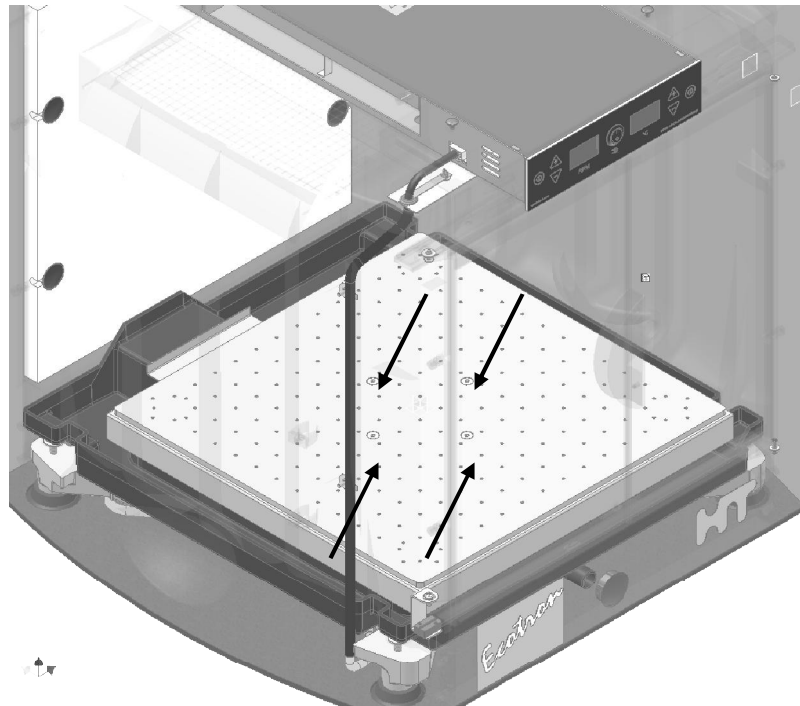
Removing the 4 screws on the shaker table- inside hexagon (M6 x 12).
